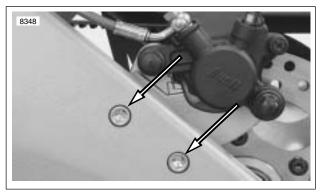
Rear Brake Caliper Carrier Fasteners
